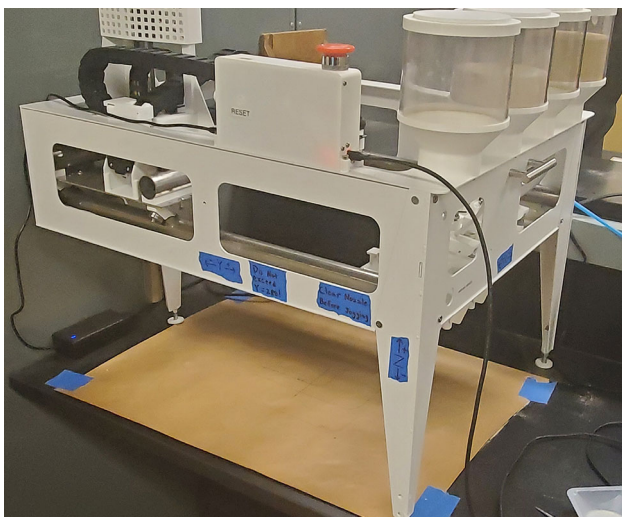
Selective powder deposition machine adapted to 3D sand printing.
